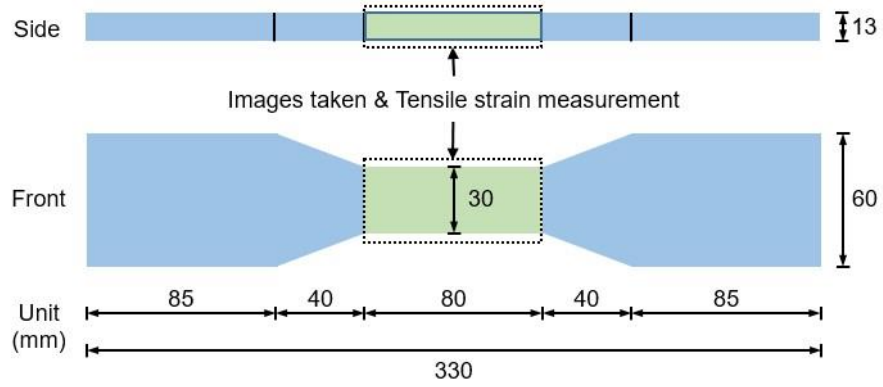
Dimensions of dumbbell specimen for uniaxial tensile test.
